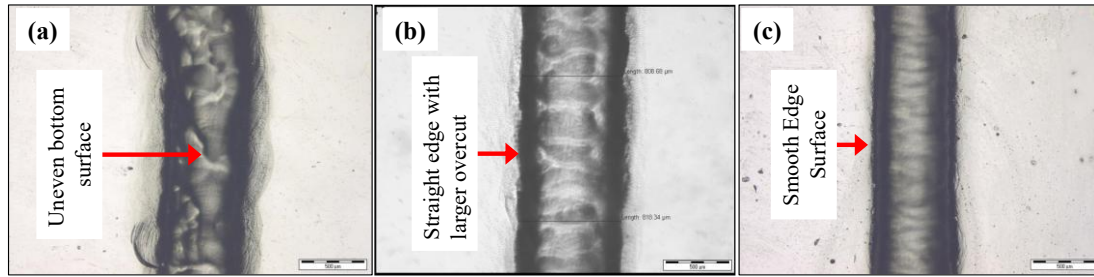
20 Optical images of machined channels (a) Existing tool feeding, (b) Bottom tool feeding, (c) Upward tool feeding
